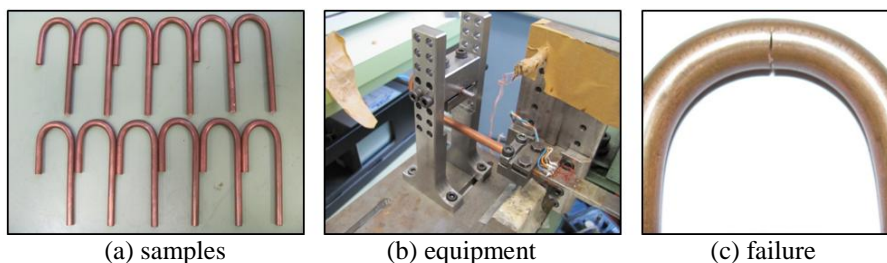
Experimental procedure to evaluate bending fatigue for tubes
